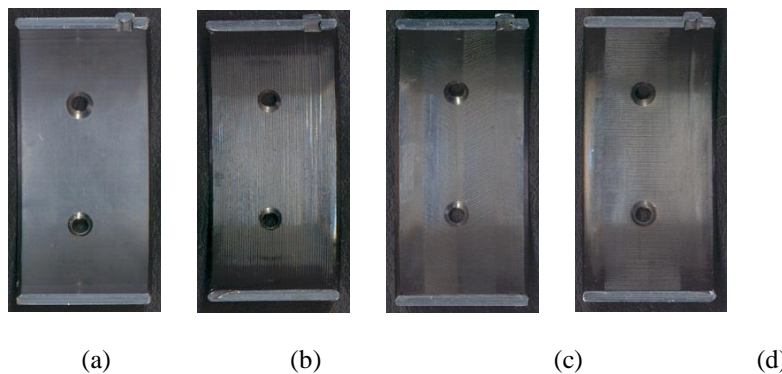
Plain (a) circumferentially (b) V-shaped (herringbone) (c) and transversally grooved (d) journal bearings
